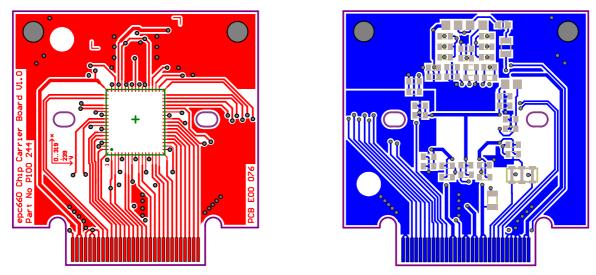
epc660 CC Chip Carrier: Layout top and bottom
